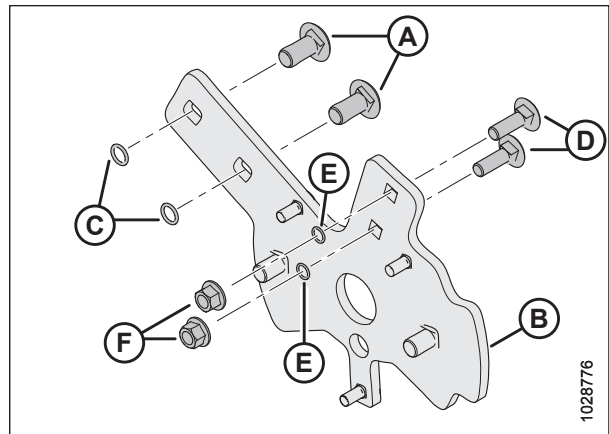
More Bolts Installed in New Right Auger Support Bar
